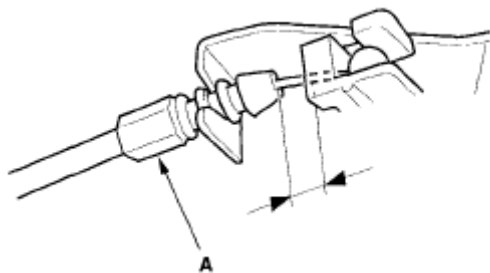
Identifying Position Of Outer End Of Cable On Trunk Lid Latch Securely
